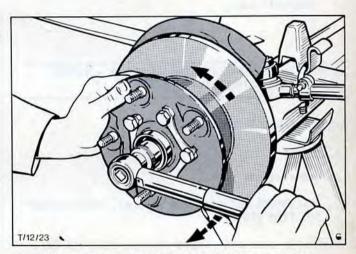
Torque hub adjusting nut to 20-25 Nm. (wheel removed for clarity)
